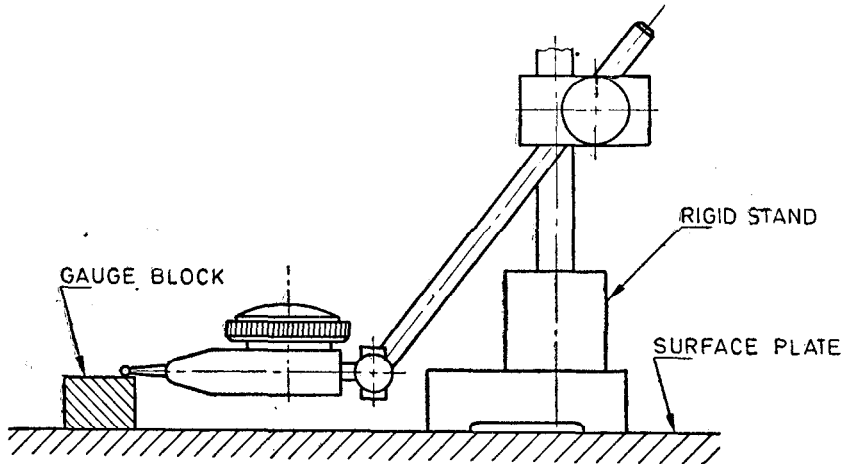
METHOD OF TESTING BY USING GAUGE BLOCKS
